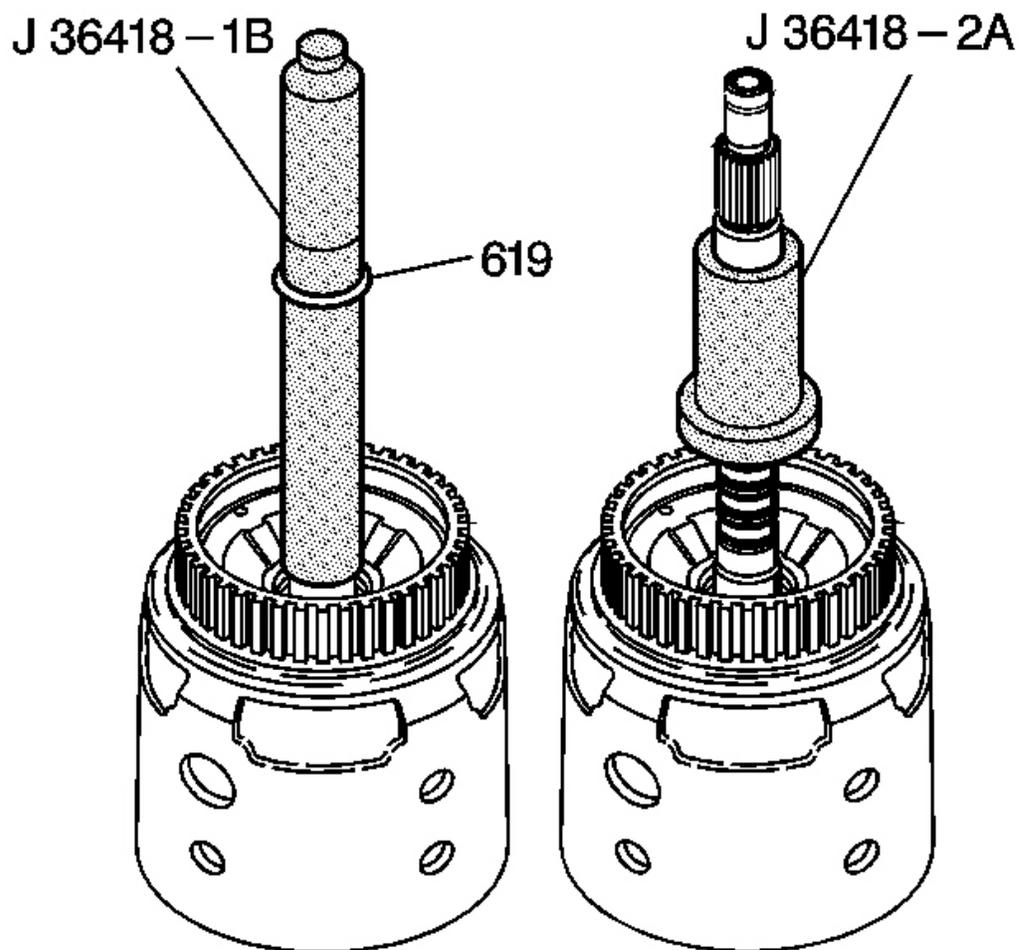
Installing Four Turbine Shaft Oil Seal Rings
